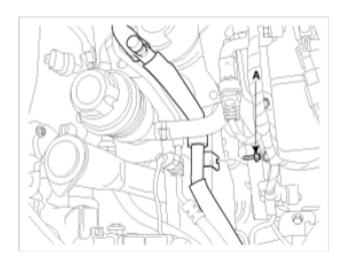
Identifying A/C Pipe Bracket Mounting Bolt
